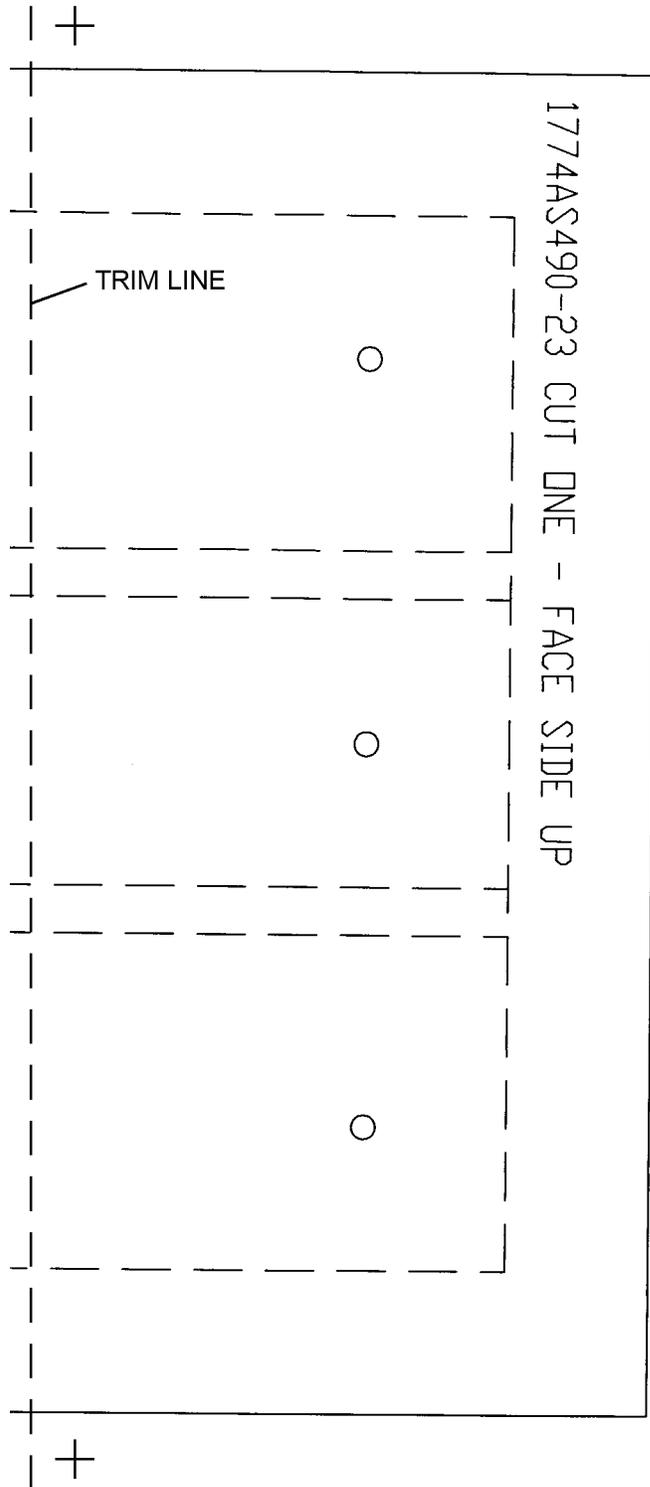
Pistol Pocket Vest Snap Fastener Panel Front Pattern (Sheet 2 of 2)
